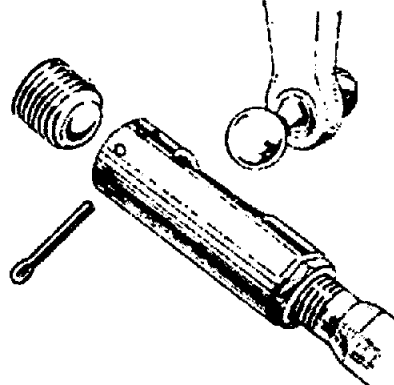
On cars fitted with adjustable drag link ends it is quicker to dismantle the joint and leave the ball pin in the drop arm.
